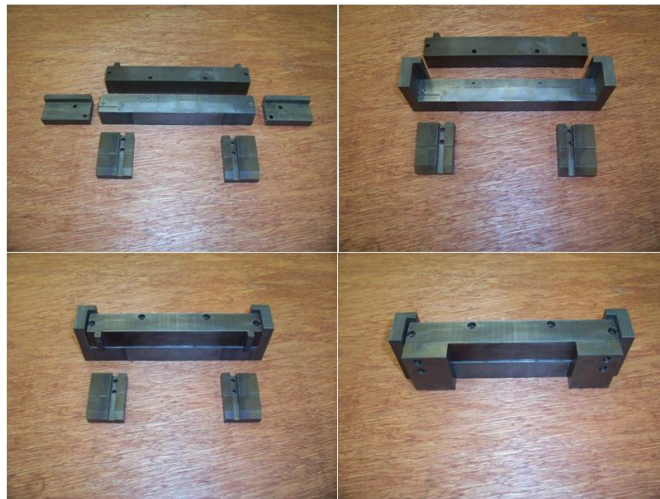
Assembly of Alignment and Epoxy Curing Fixture. This series of pictures shows how the new alignment and epoxy curing fixture fits together.
